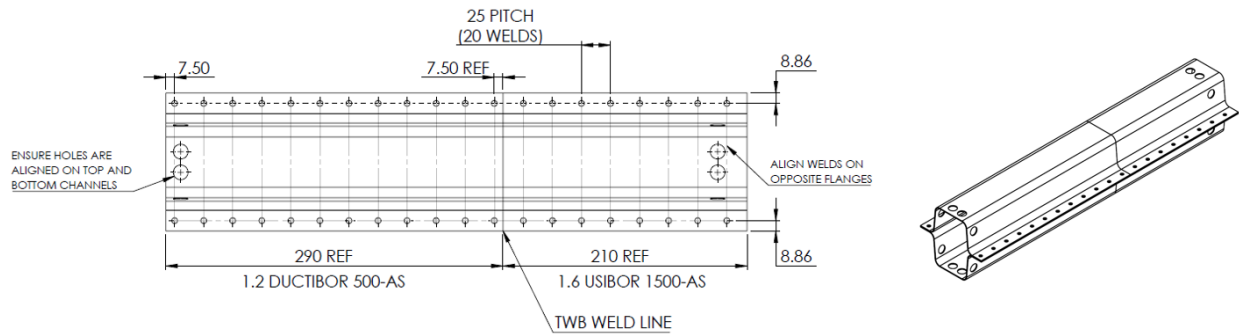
Spot welding of channels to create crush rails. TWB part shown, monolithic are identical. Dimensions in millimeters.
